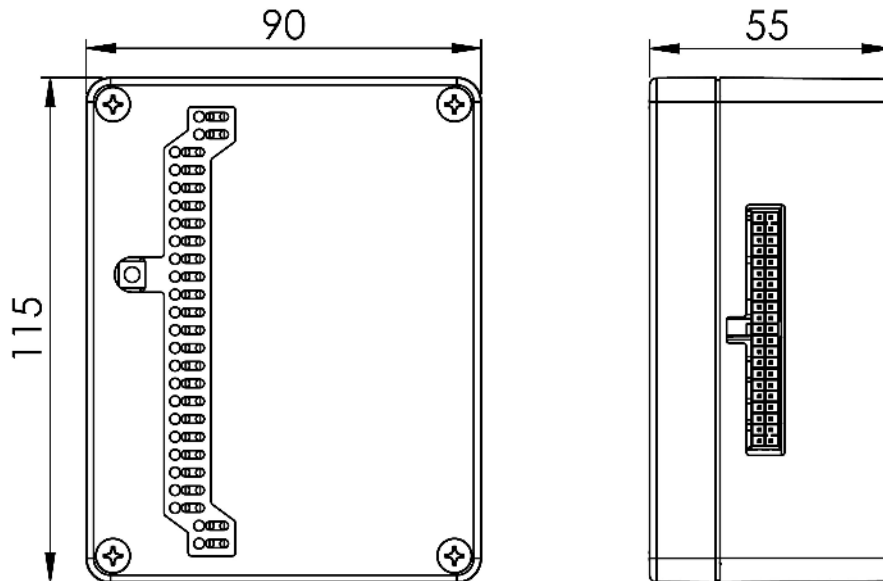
Mechanical Drawing of G5 Cell Connection Tester
